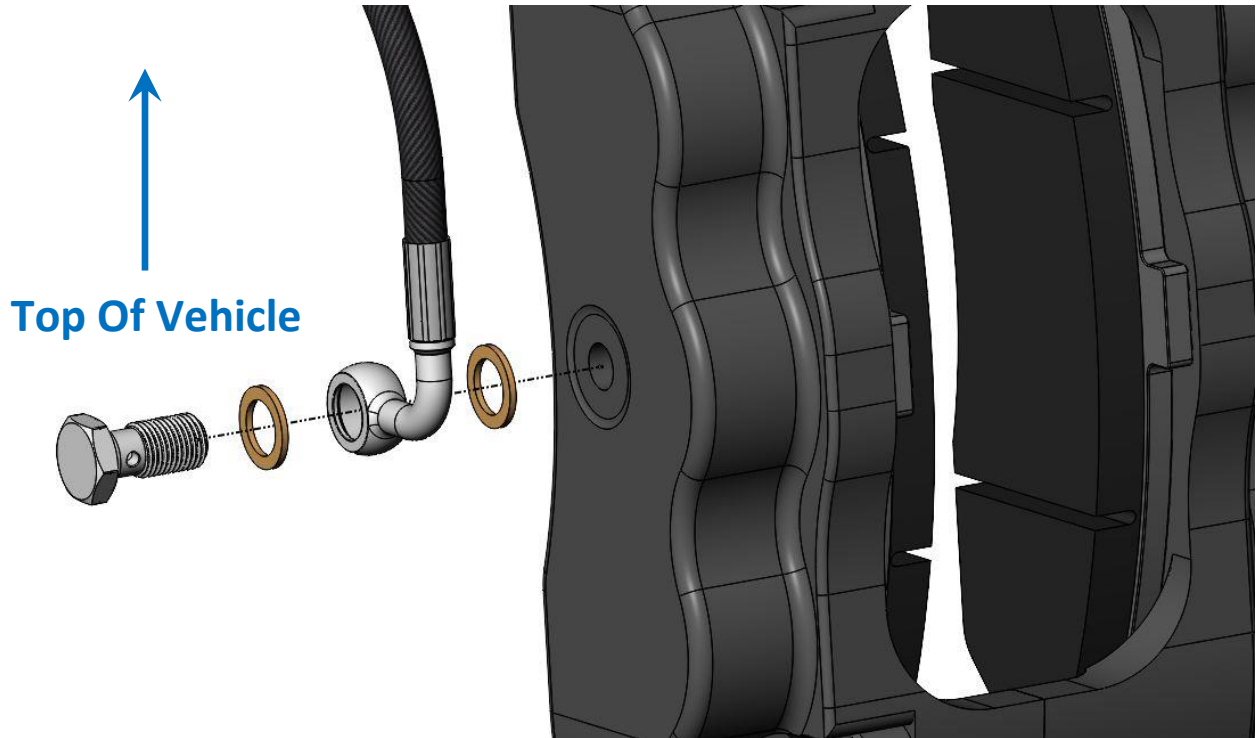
Stainless Steel Braided Hose Installation (RH Shown)
